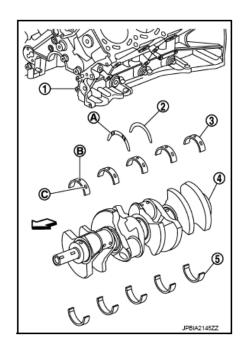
Locating Cylinder Block, Thrust Bearing, Crankshaft And Main Bearing (Upper And Lower)
